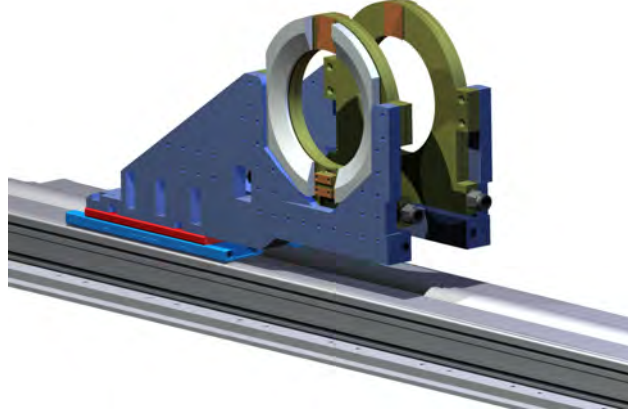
showing the transport coil system mounted to provide a centre height of 265mm to coincide with the trap centre of the 3D MOT coils. The transport coils are mounted onto two rigid anodised aluminium bodies, shown in blue, which also provide mounting points for electrical connections and for the flexible chain used to guide piping and cables during motion. The transport coil mounts are mounted onto a base plate, shown in red, which allows alteration of the coil separation using sliding blocks. This fixes directly onto the carriage of the linear actuator, shown in bright blue. The linear actuator is mounted onto a 1.2m long, 15mm thick aluminium base plate. For scale, the separation of the coils is 95mm and their radius is 83.7mm.
